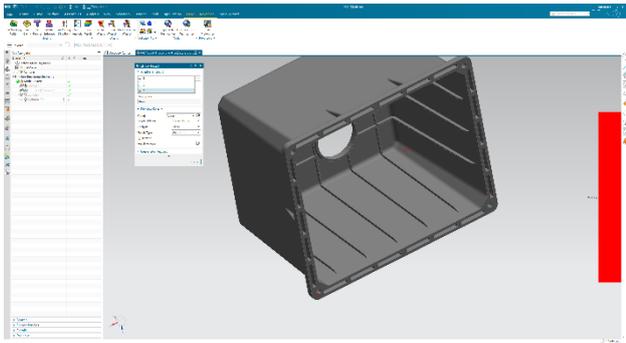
Weld Line Visualization on the Servo Drive Housing
